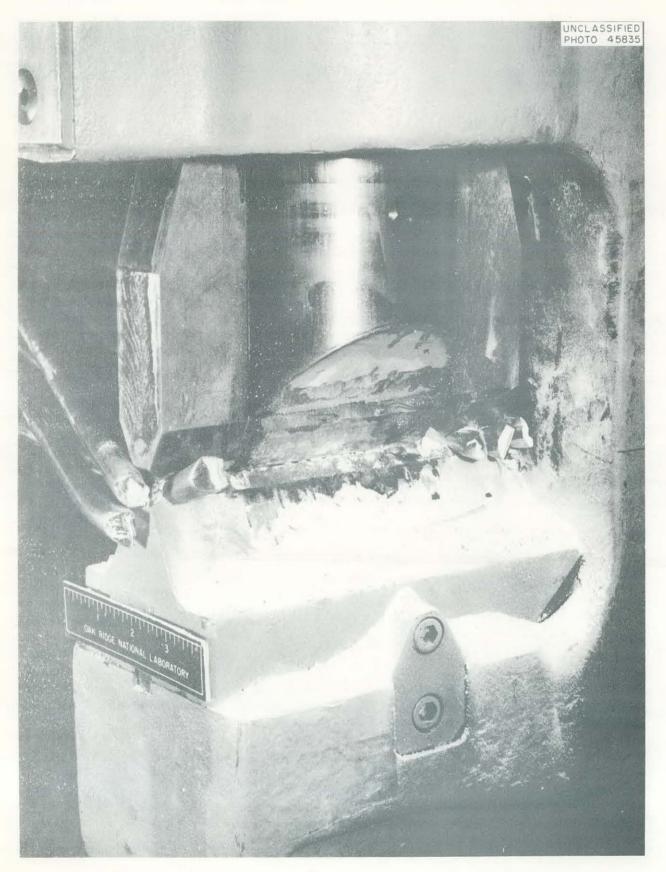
"Line of Contact" Blade Cutting Mark I Prototype.
